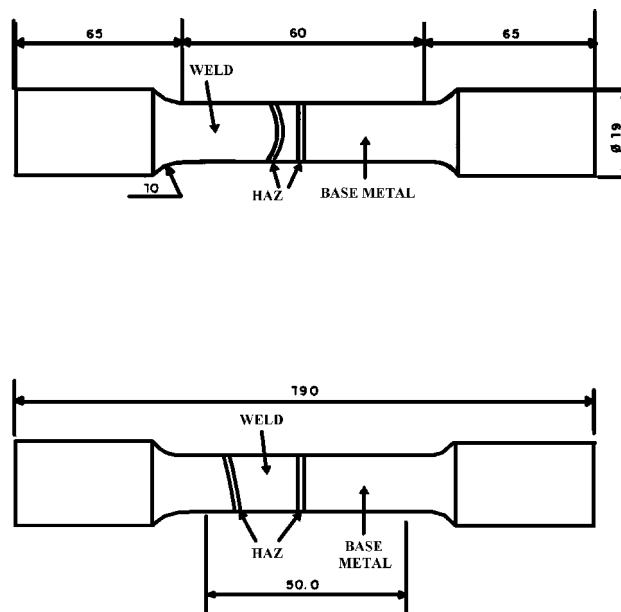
Tensile testpiece of the welded joint. The testpiece was taken from the half-thickness region of the plate. Dimensions are in millimeters.
